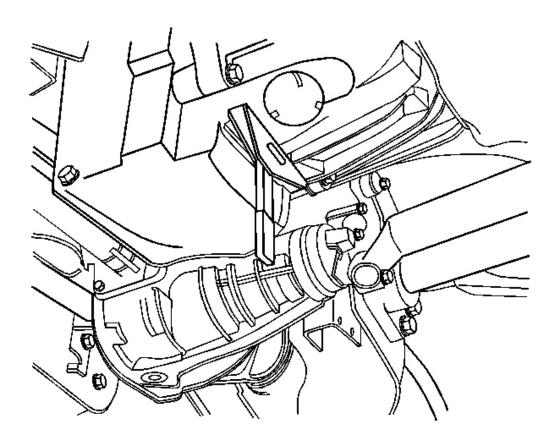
Locking Flywheel With Special Tools Courtesy of GENERAL MOTORS CORP.
